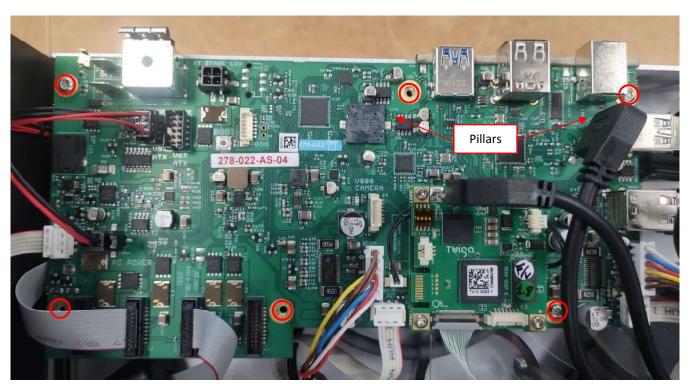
6x (T10 Torx) Control PCB retaining screws.
